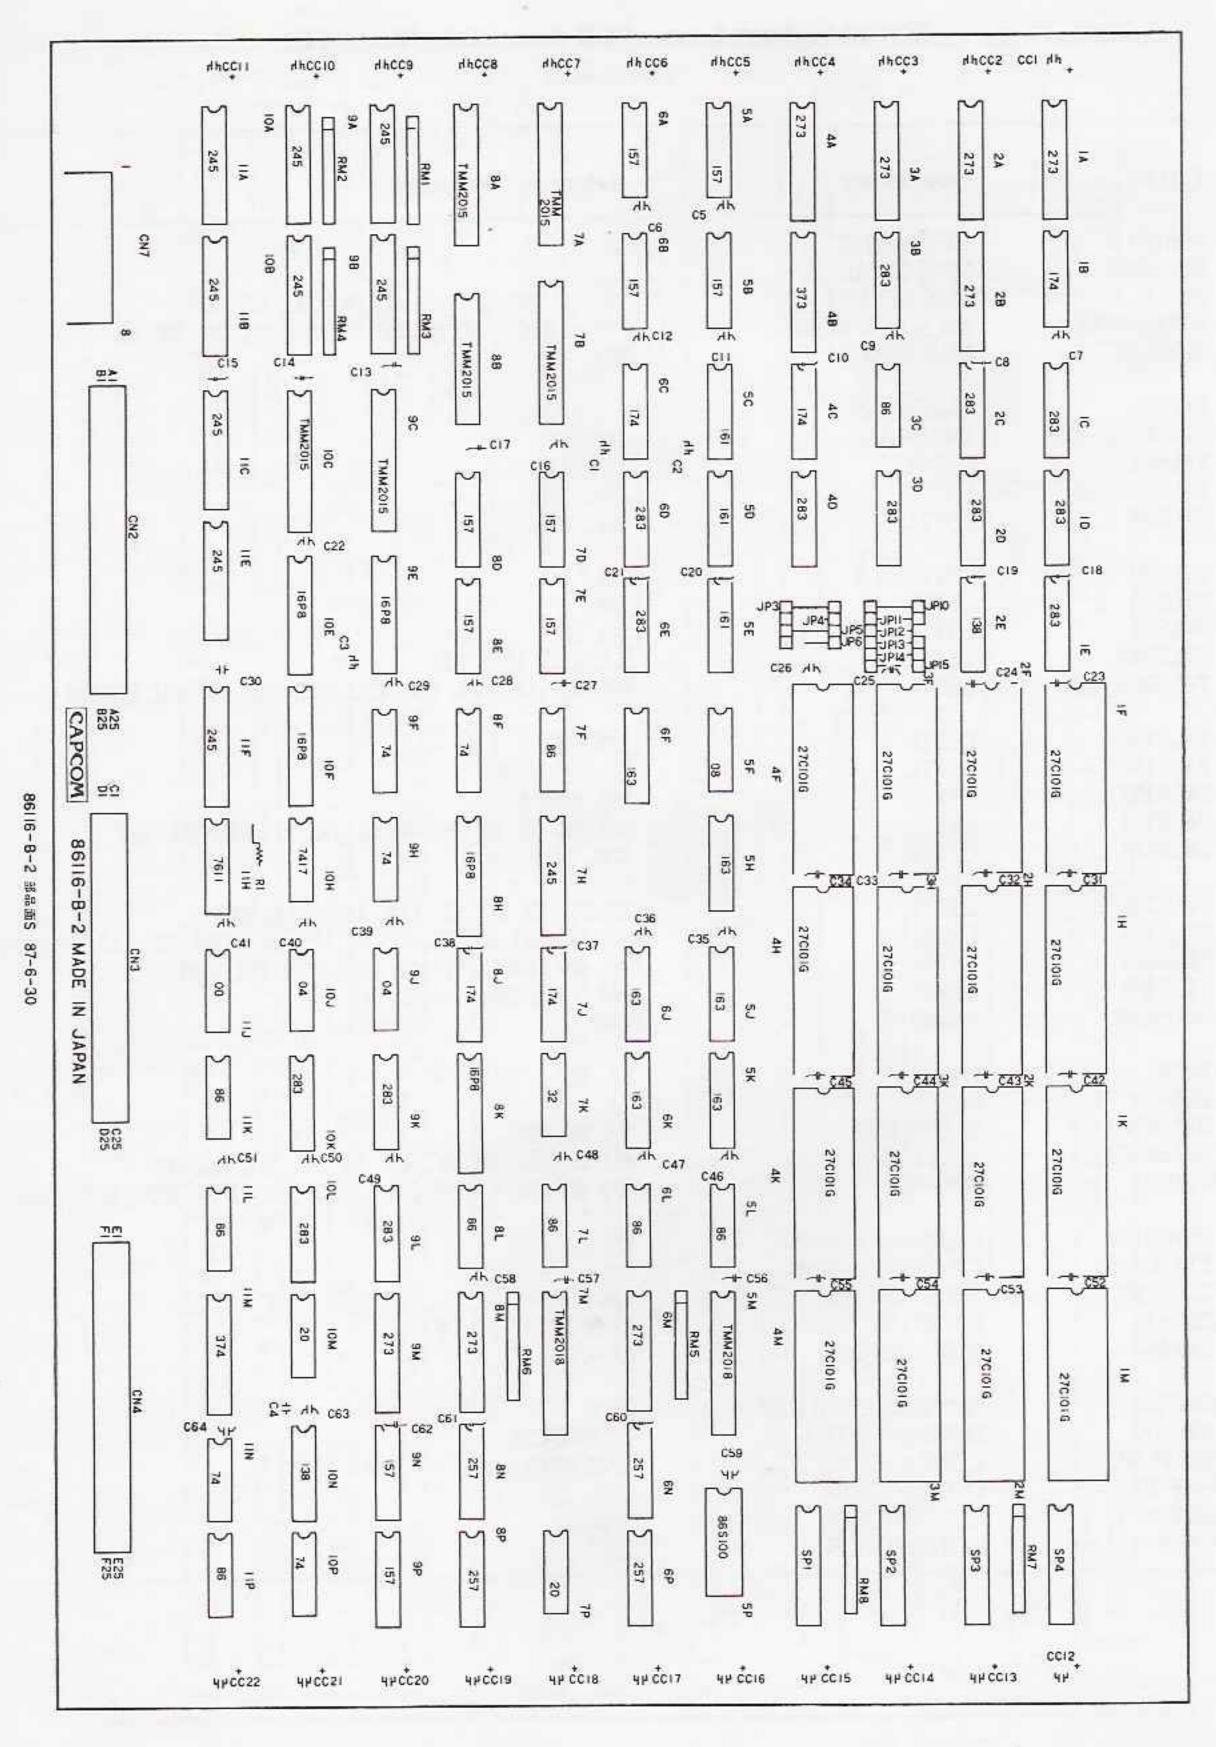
Street Fighter Game PCB Assembly (Board B) 86116-B
